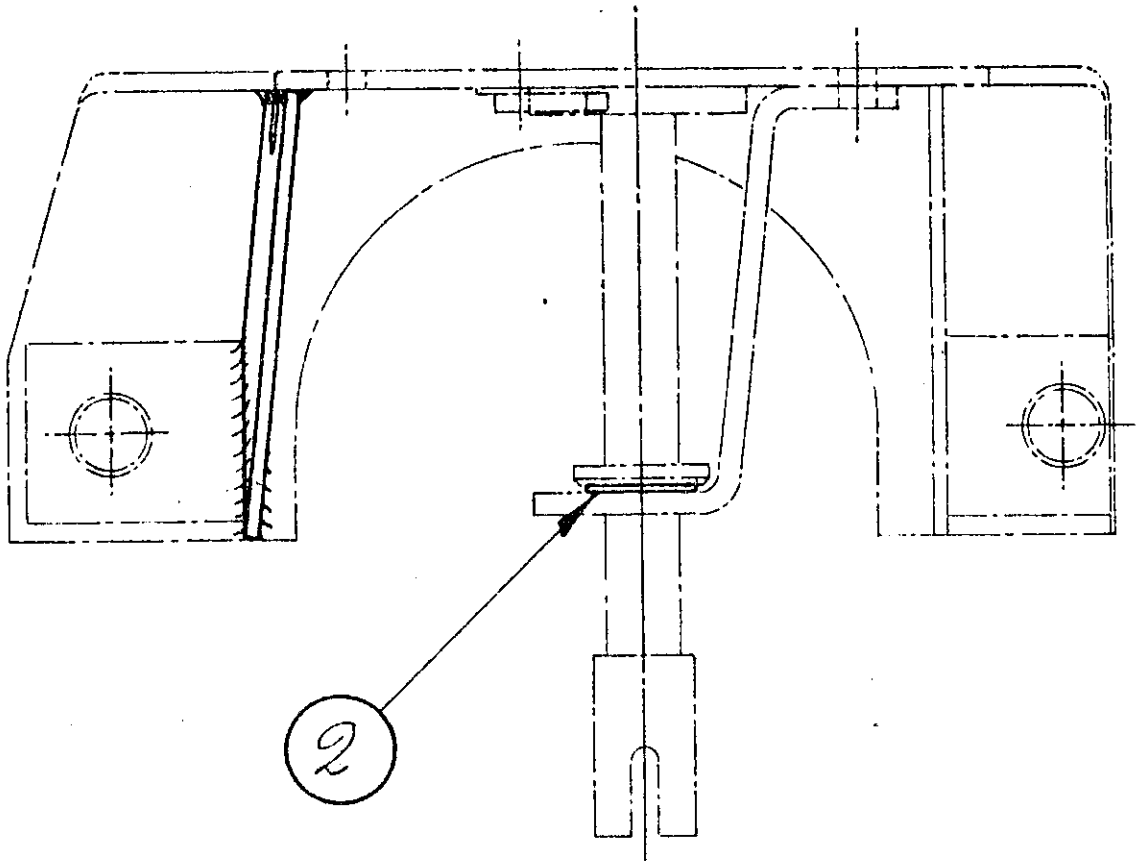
SHAFT, SPARE WHEEL ASSEMBLY
